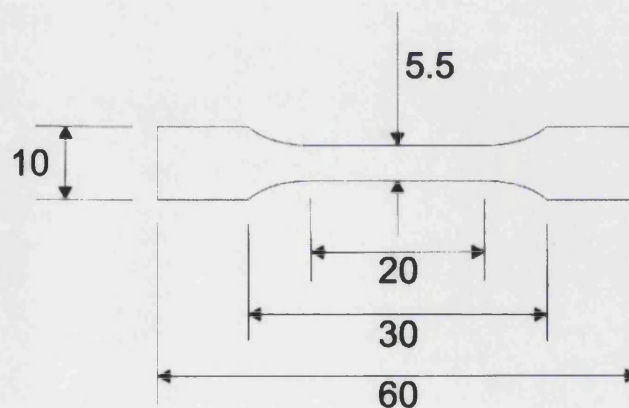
Dimensions of dog bone test pieces used in all experiments in mm.
